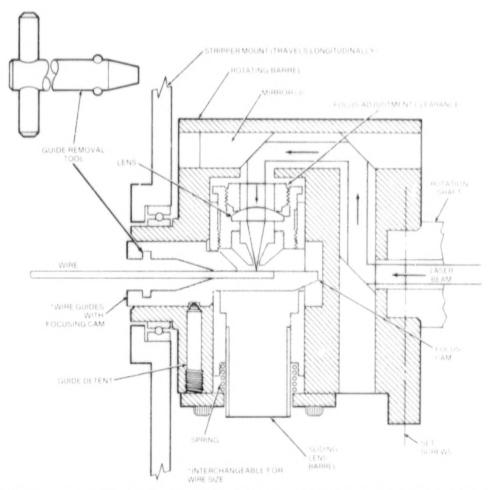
Wire guides also position focusing lens in laser wire stripper at the optimum distance for cutting the insulation. Various interchangeable collets are used for holding wire sizes from AWG 26 to 1/0. (MSC-19496)
